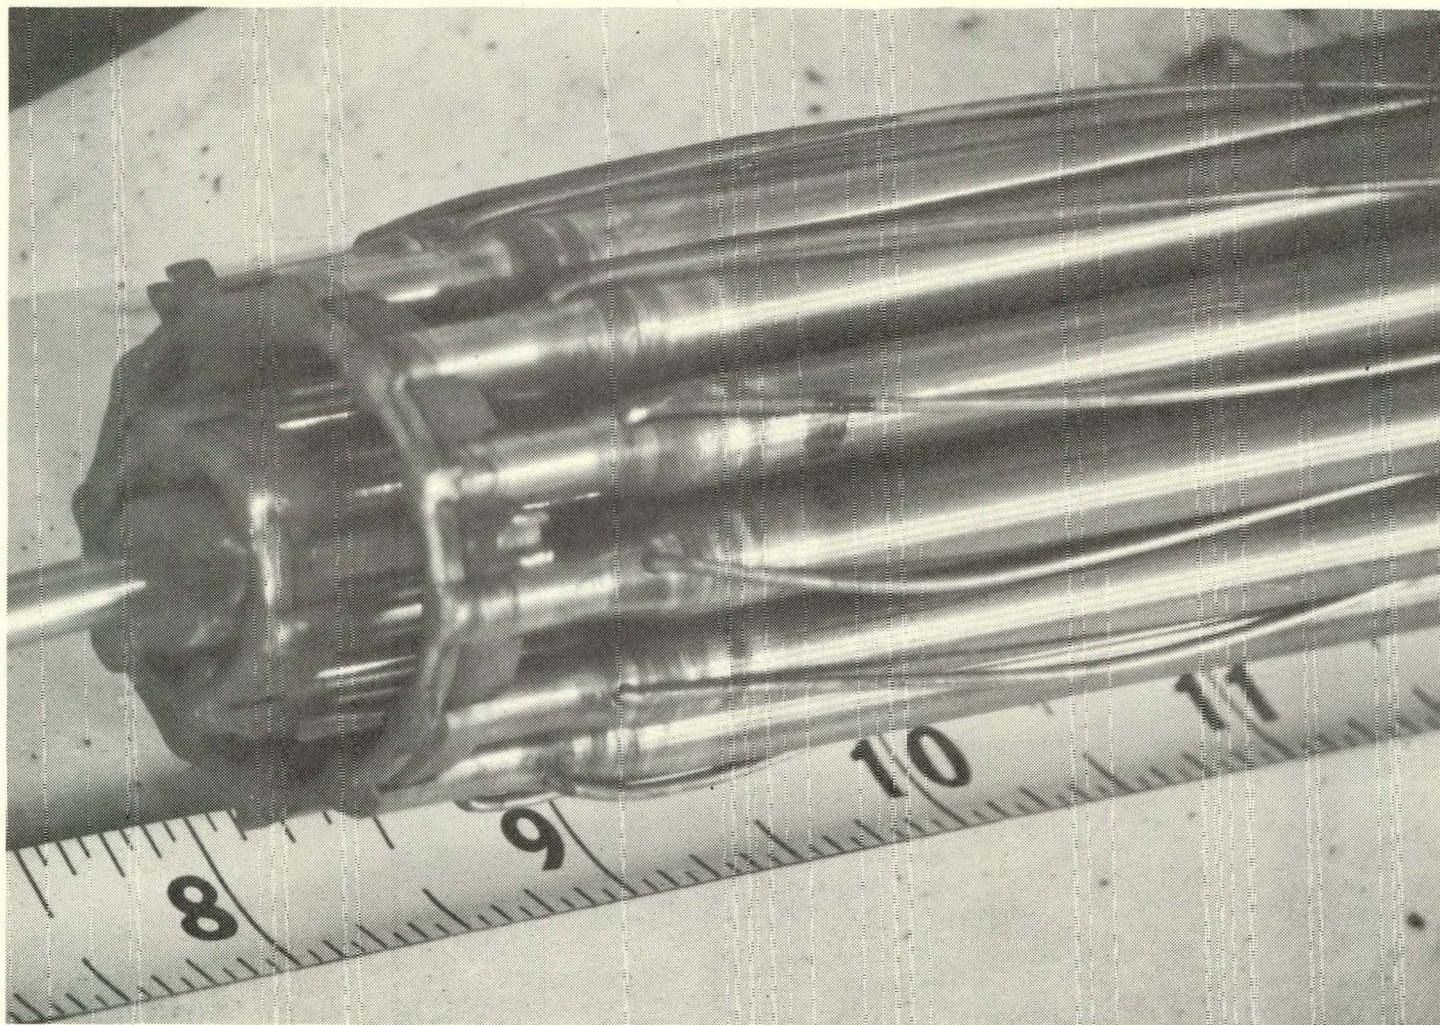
PIN-TYPE FUEL ELEMENT SHOWING SPIDER AND PIN ASSEMBLY
